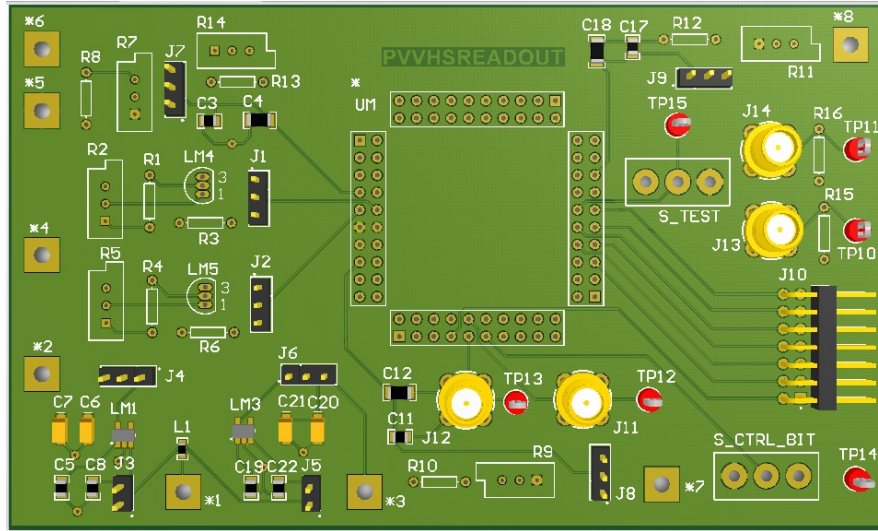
3D Top layer of the BCB board test in Altium.
